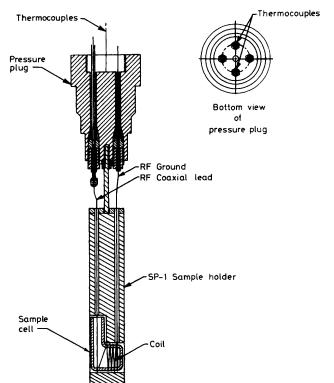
Assembly drawing for the high-resolution, high-pressure ¹⁸C n.m.r. probe
